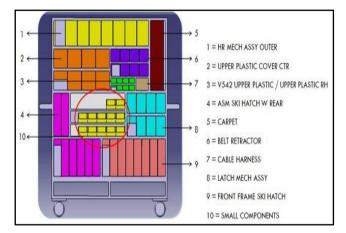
Kitting trolley configuration 60% (RB60%) side kitting rack
